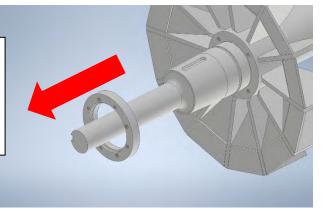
Removing Flywheel Retaining Flange (BH)
